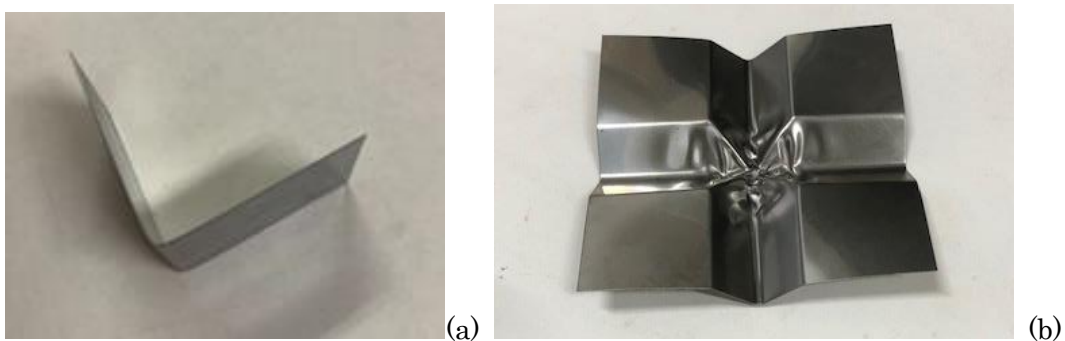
A specimen after bending, (a) V-bending and (b) Orthogonal bending
